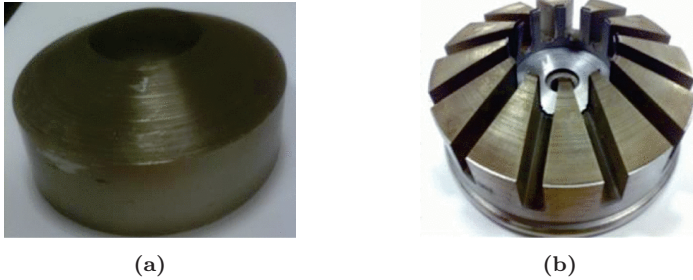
AFM rotor structure; (a) uncut, (b) cut [52].
